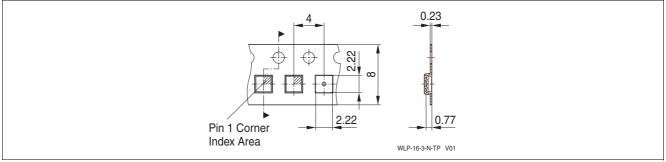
Tape for WLP-16-3 (dimensions in mm)
